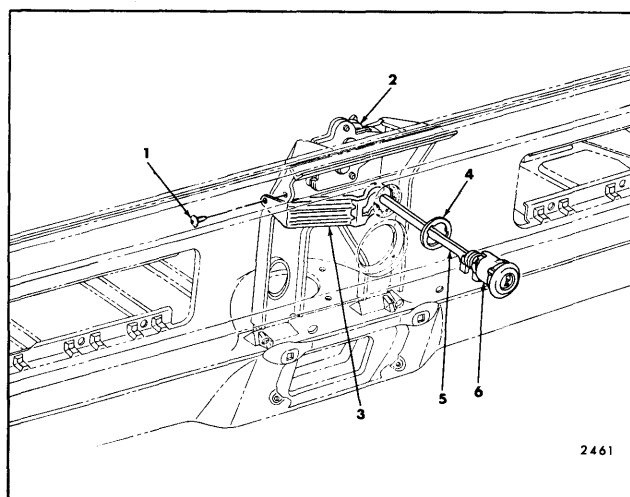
Rear Compartment Lid Lock Cylinder Assembly - Pontiac "A" and All "F" Styles
